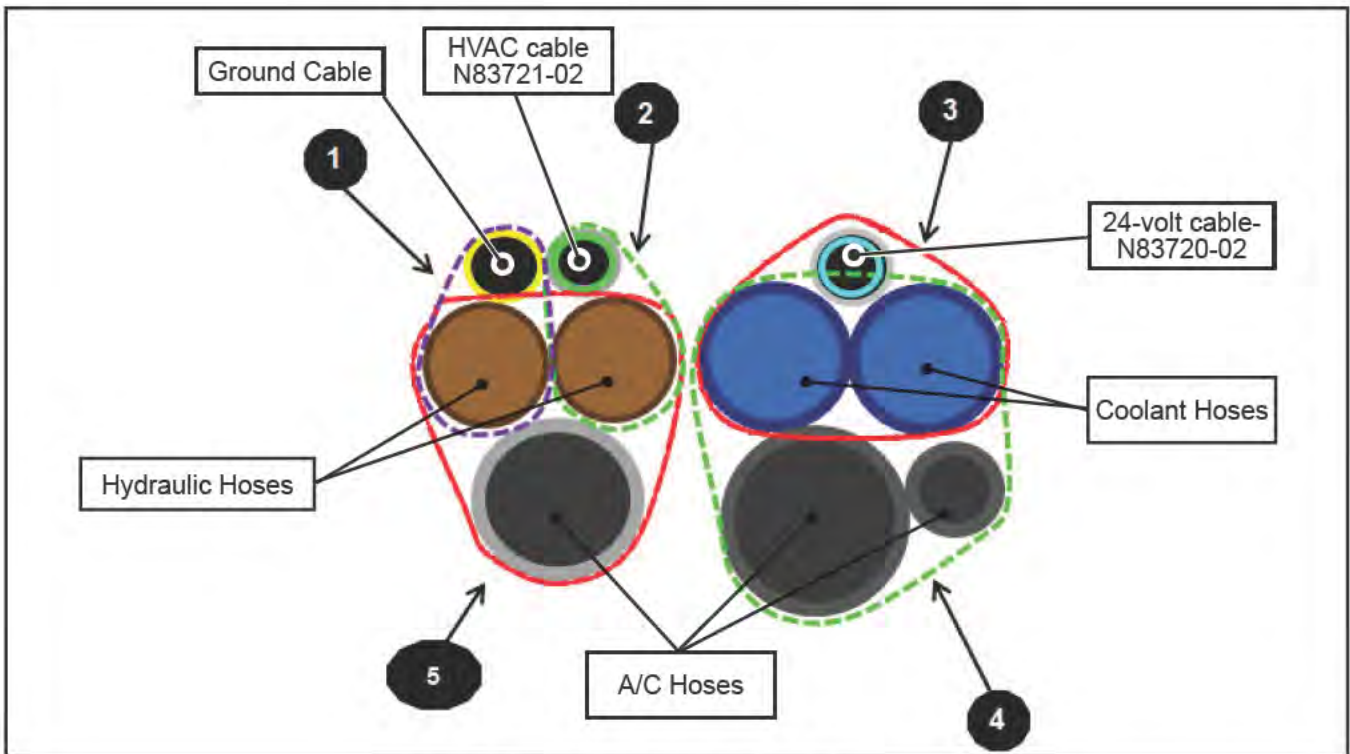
Use Five Cable Ties, Front Section View (typical for the rear)
